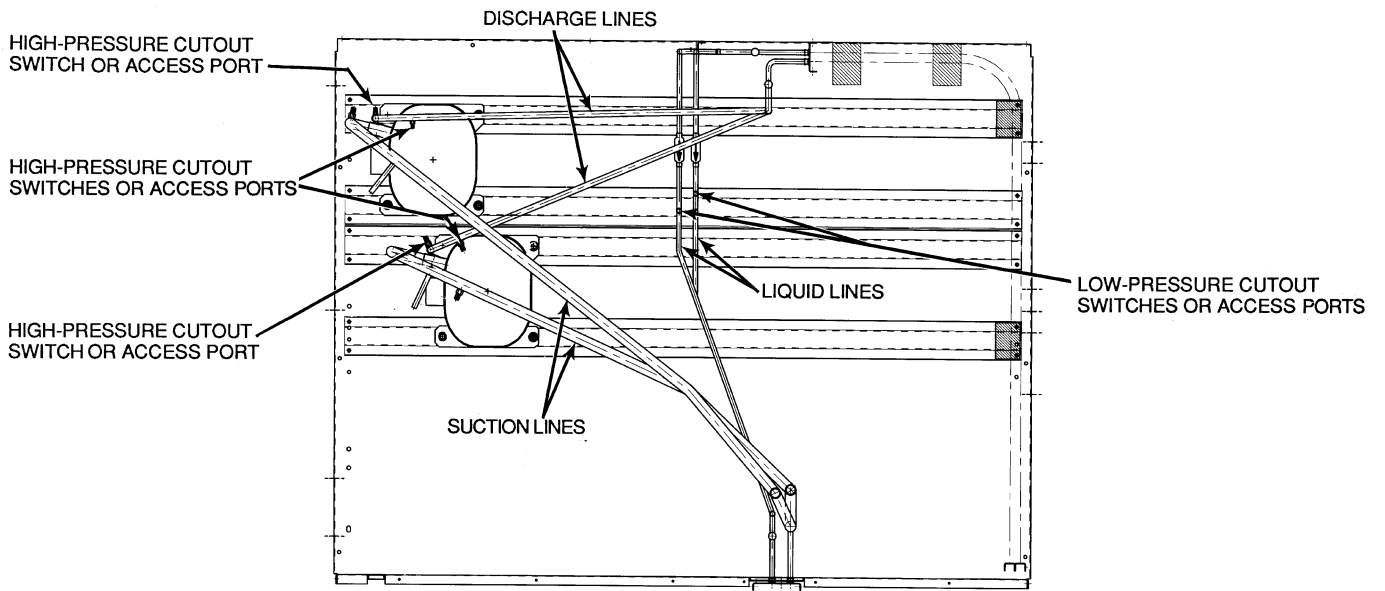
Typical High-Pressure Cutout Switch and Low-Pressure Cutout Switch Installation Locations (2-Compressor Unit Shown)
